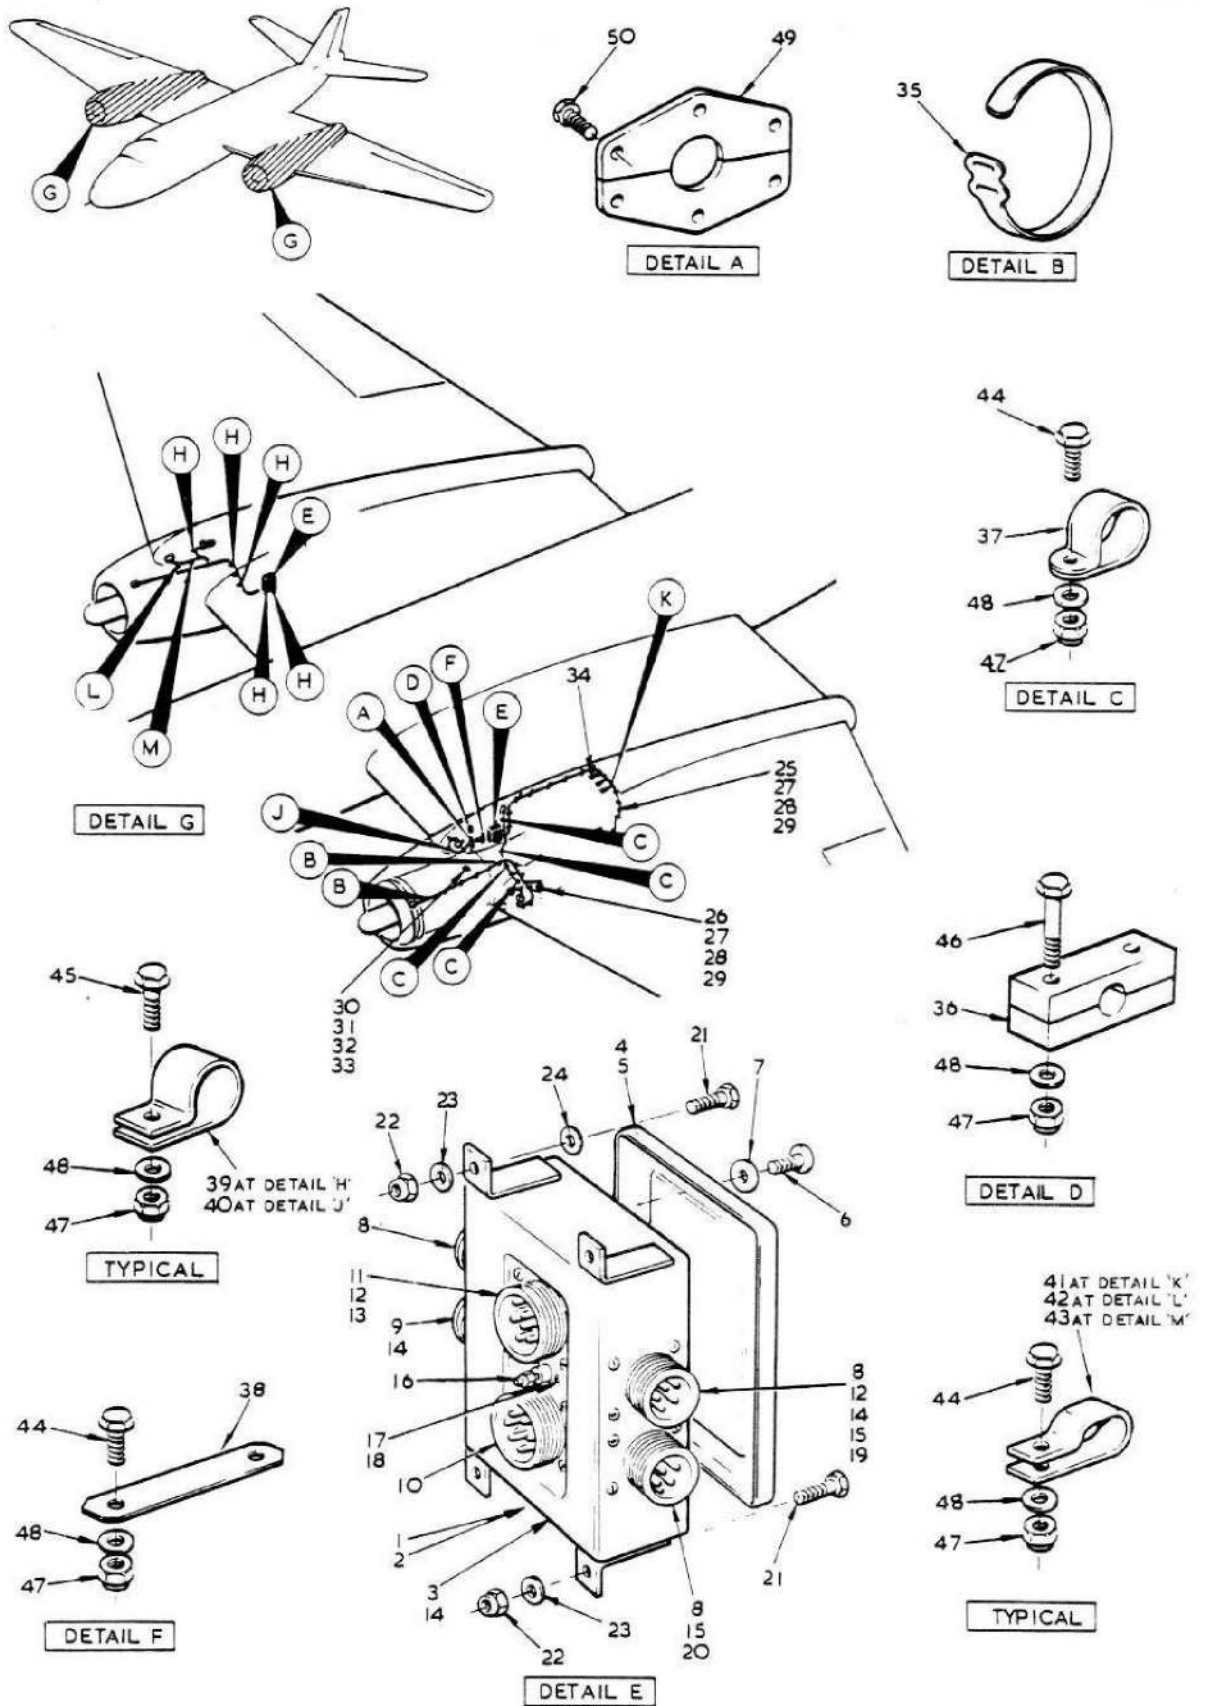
ELECTRICAL EQUIPMENT IN WINGS
